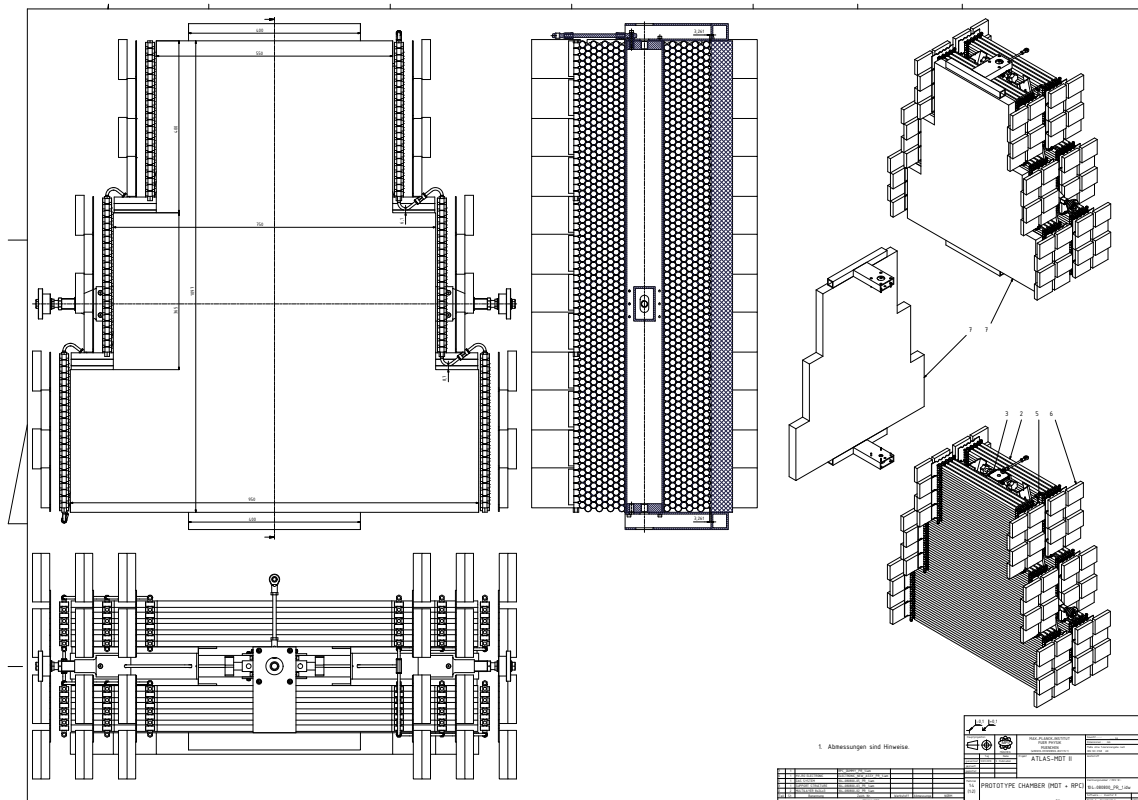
Technical drawing of the prototype chamber. The front-end electronics currently extend beyond the tube envelope; this is due to the re-use of the active ATLAS read-out electronic cards, designed for chambers with 30 mm diameter drift tubes and the need to accommodate a four times higher channel density. On the upper right side, the drawing also shows how an optional trigger chamber can be mounted on the drift tube chamber.
